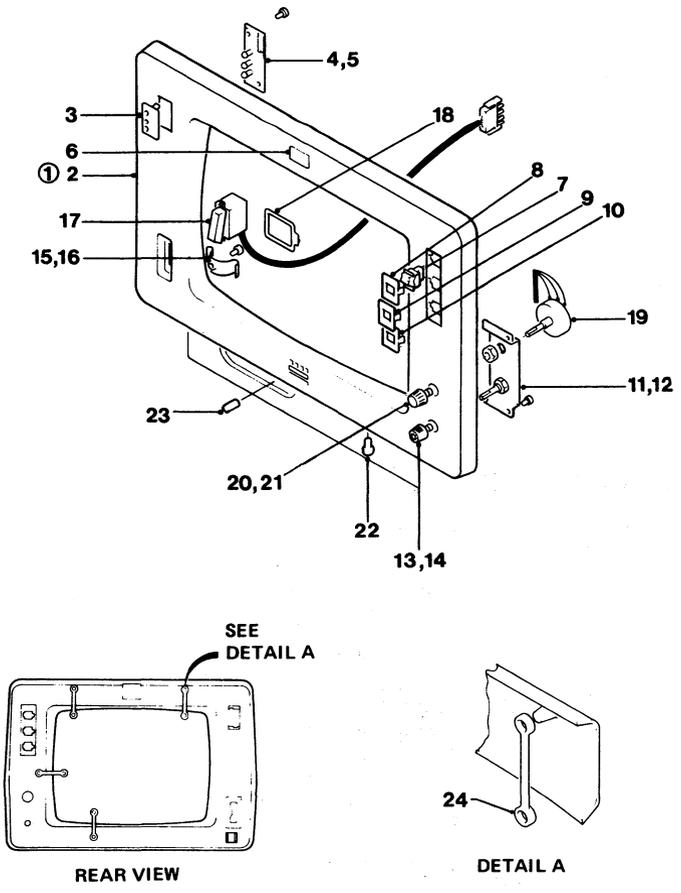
(Sheet 1 of 4). Front Enclosure Assembly
